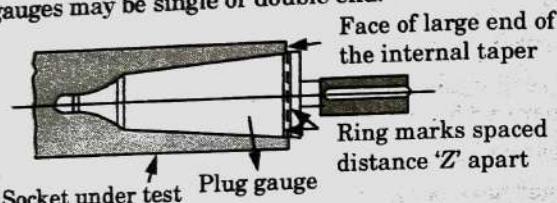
Testing taper of socket with plain plug gauge.
